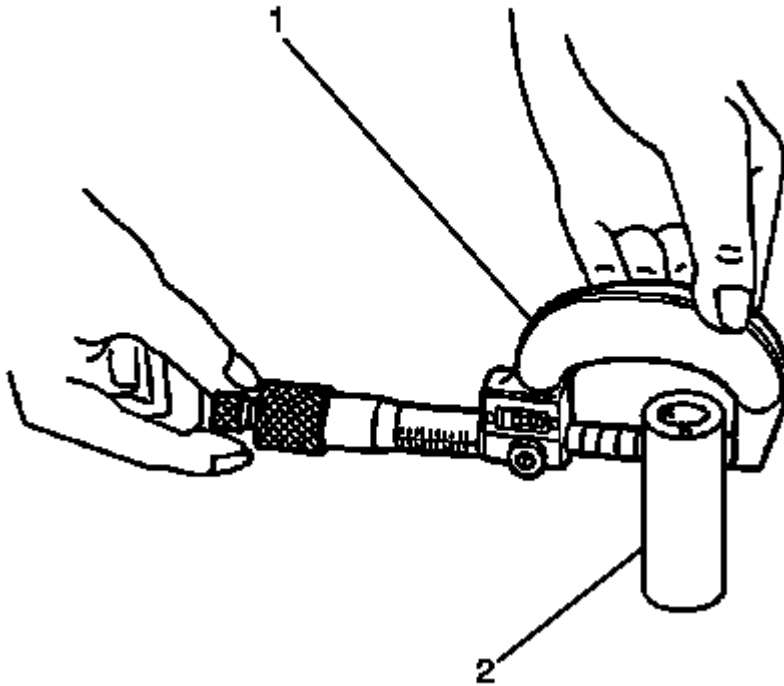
Identifying Piston Pin Bore To Piston Pin Measurement From Outside Micrometer
